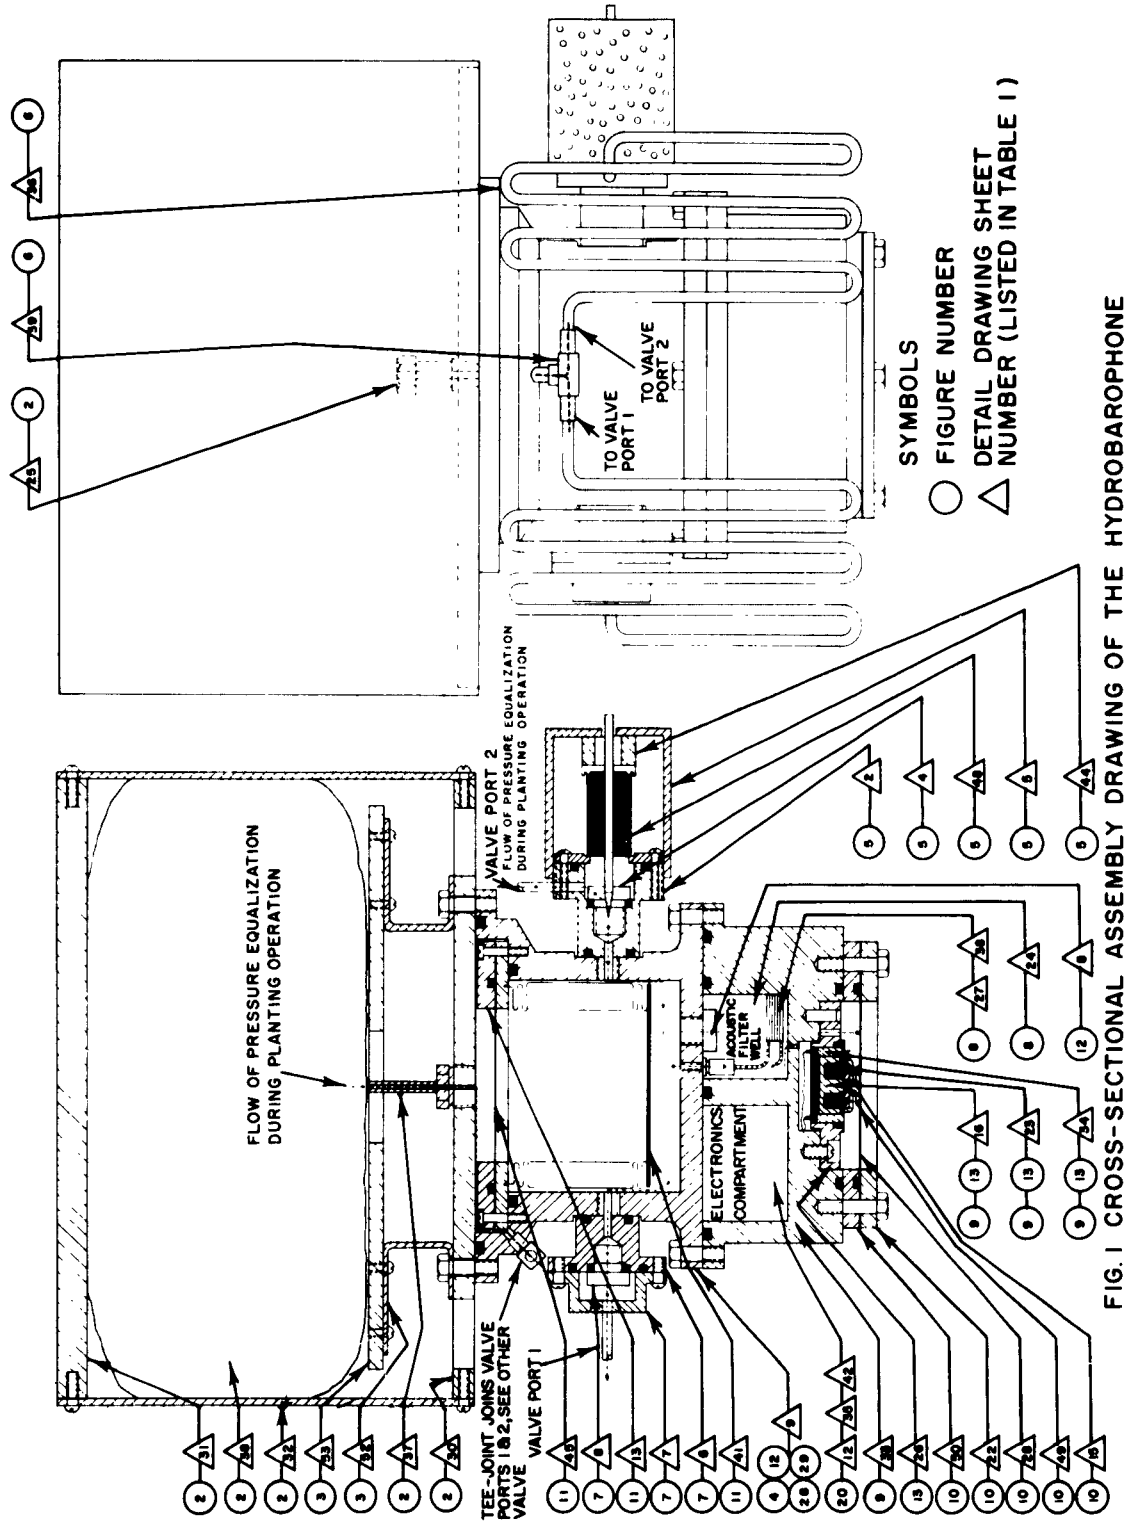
CROSS-SECTIONAL ASSEMBLY DRAWING OF THE HYDROBAROPHONE
